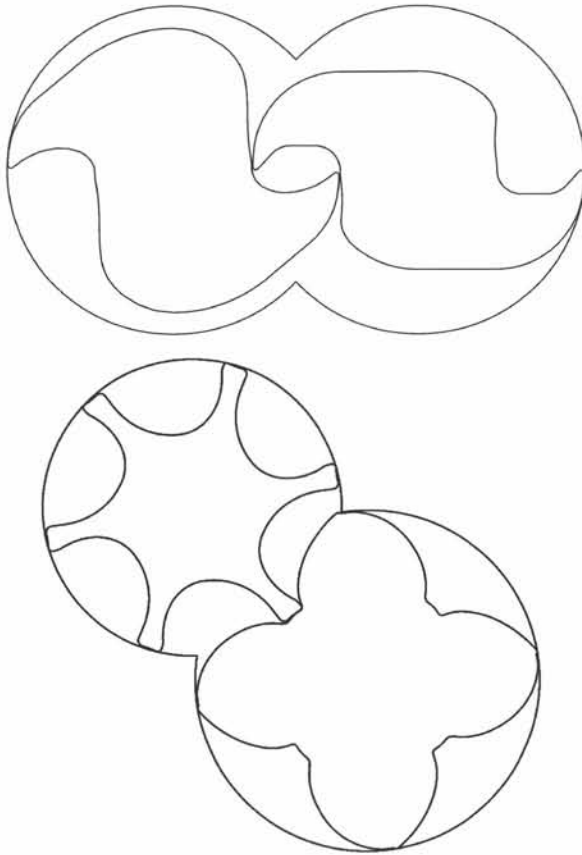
A 2D slice of the tooth compressor casing (top) and the screw compressor casing (bottom)
